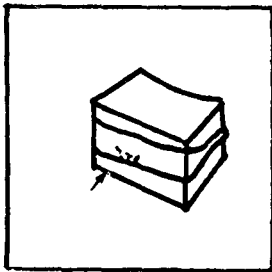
Creep fissures of the welded zone of furnace tube.
